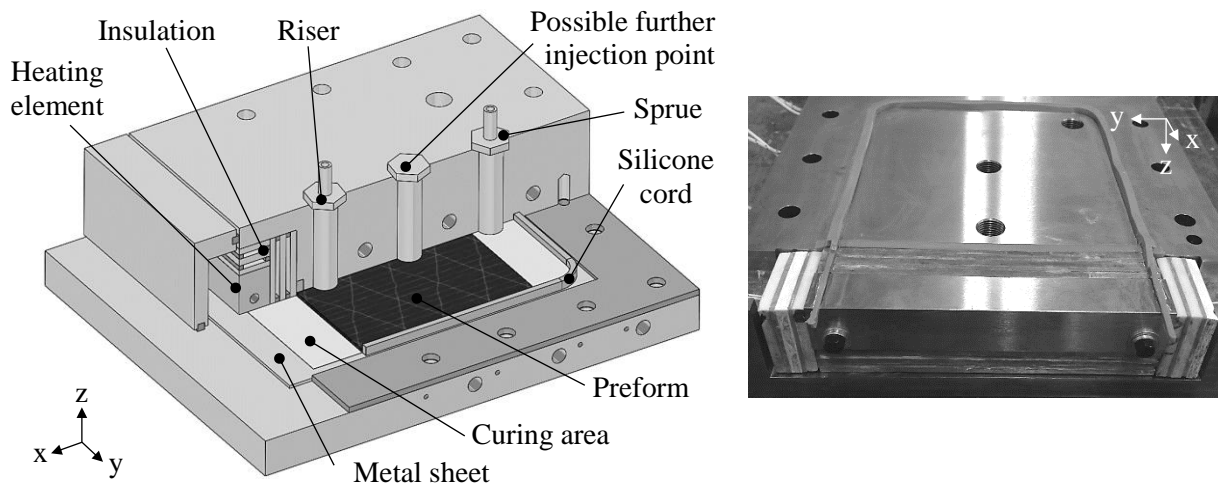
Sectional view (left) and upper mould with sealing components (right) of the RTM-tool for flat plates
